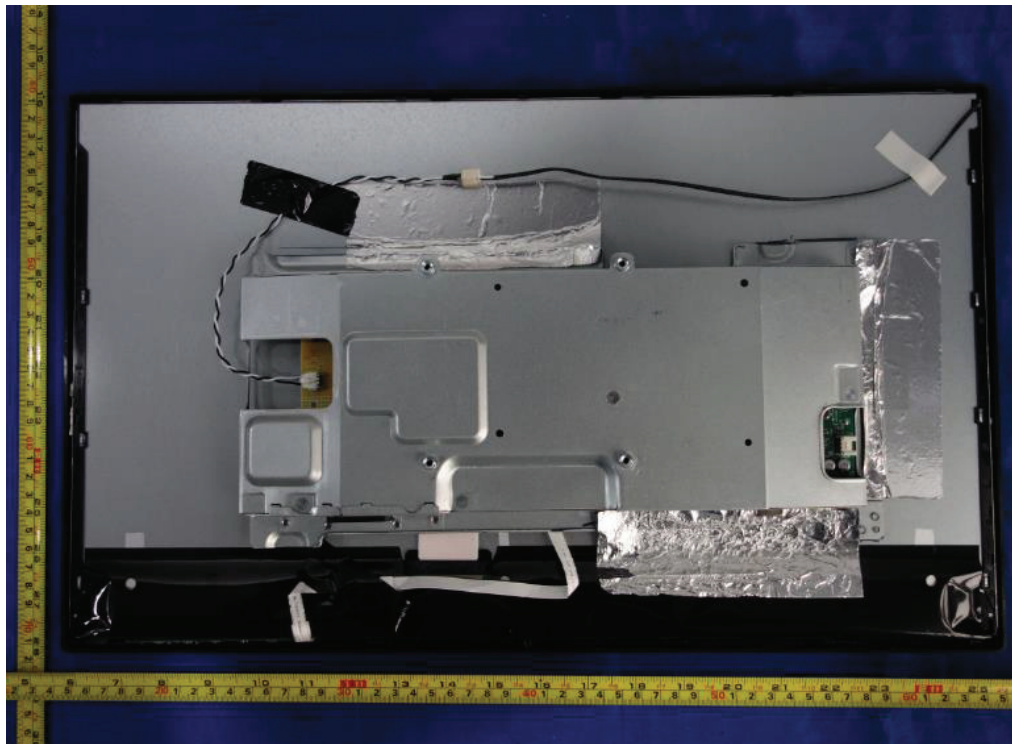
Metal enclosure type C with power board 715G7300 and main board 715G9496
